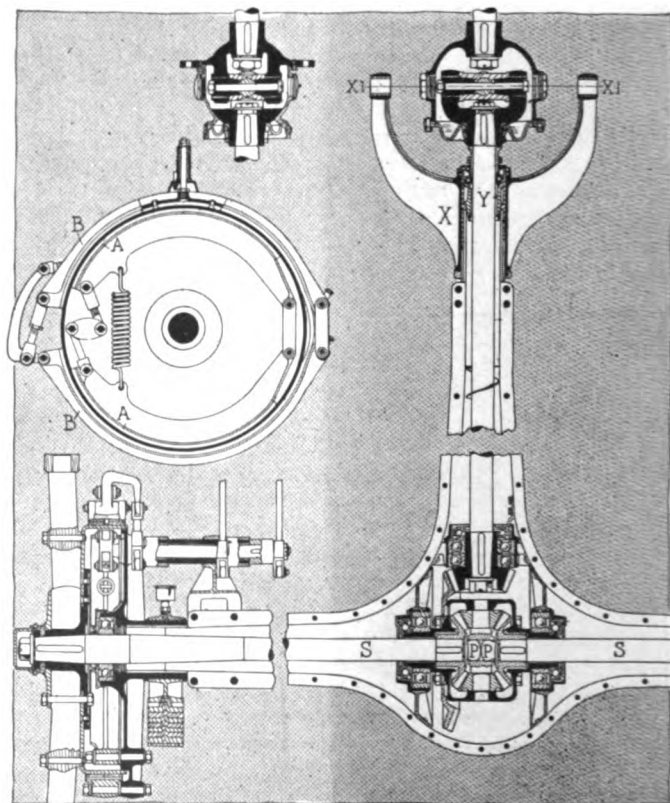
Section showing construction of Flat rear axle and brake mechanism
